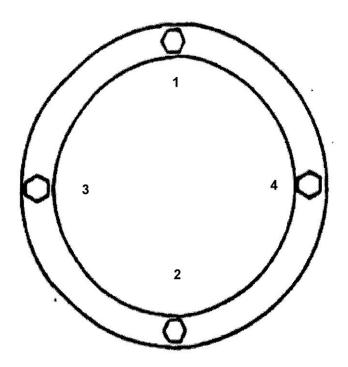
Torquing sequence for circular four-bolt flange.
